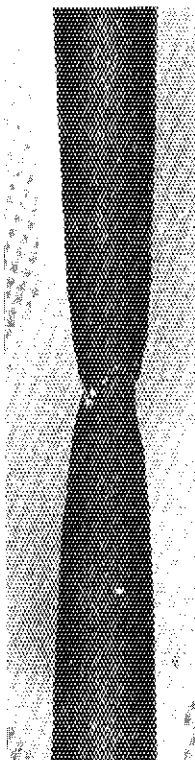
View of fracture portion of base metal and weldments after aging at 800°C for 1000h
